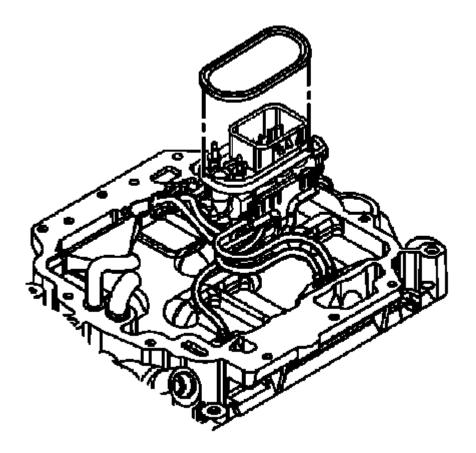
View Of Fuel Meter Body O-Ring Seal Courtesy of GENERAL MOTORS CORP.
